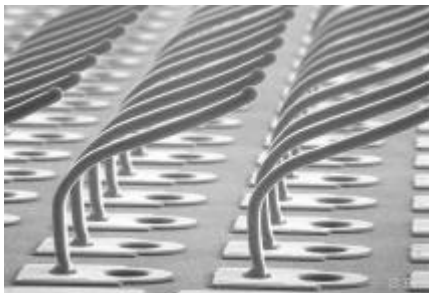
Formfactor microsprings™ make electrical contact with pads by aligning and pressing in place.
